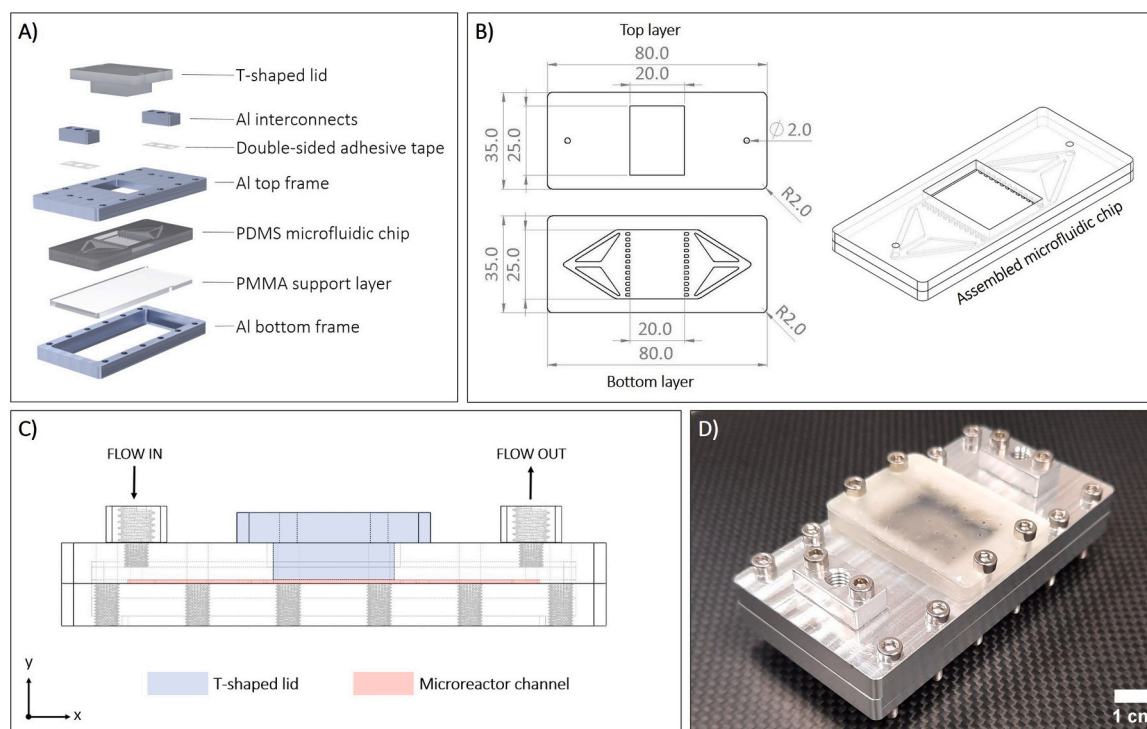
The key elements of the microreactor. A) Exploded view showcasing the main assembly components. B) Design specifications of the PDMS microfluidic chip, with characteristic dimensions provided in millimetres. C) Cross-sectional view of the microreactor, highlighting the alignment of key assembly components. D) Image of the fully assembled microreactor.
